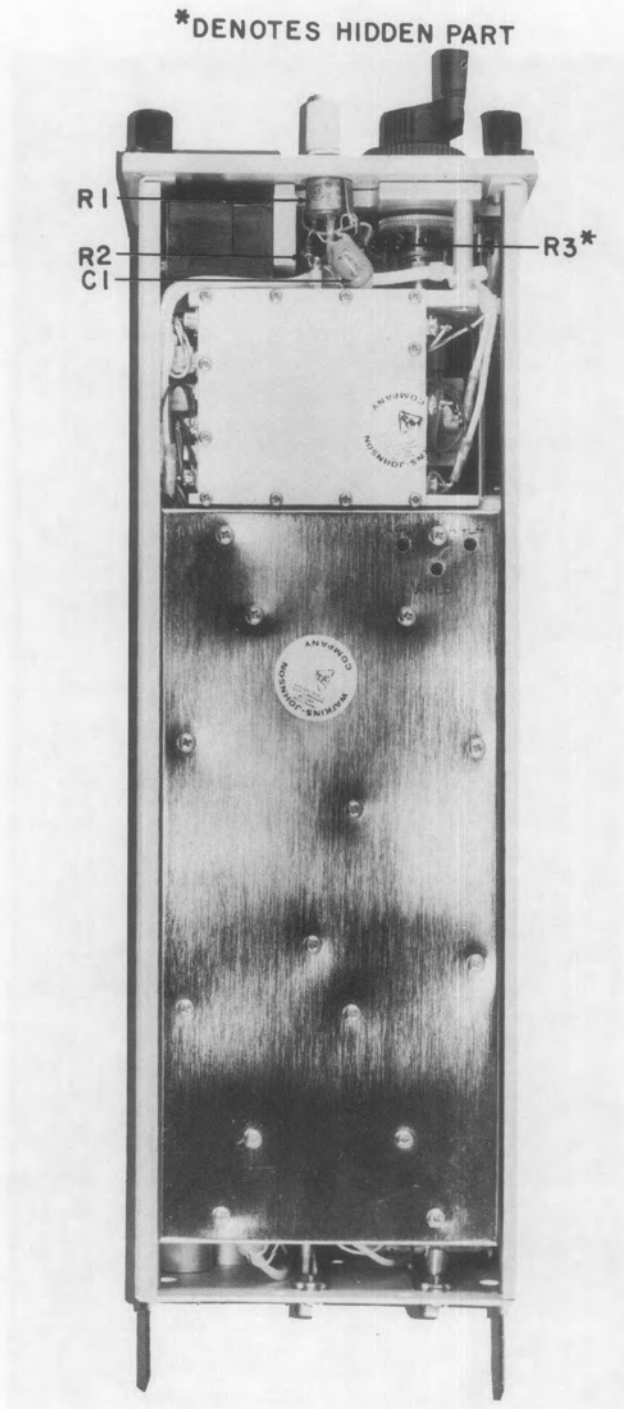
Type VH-107 Tuning Head, Bottom View, Location of Components
